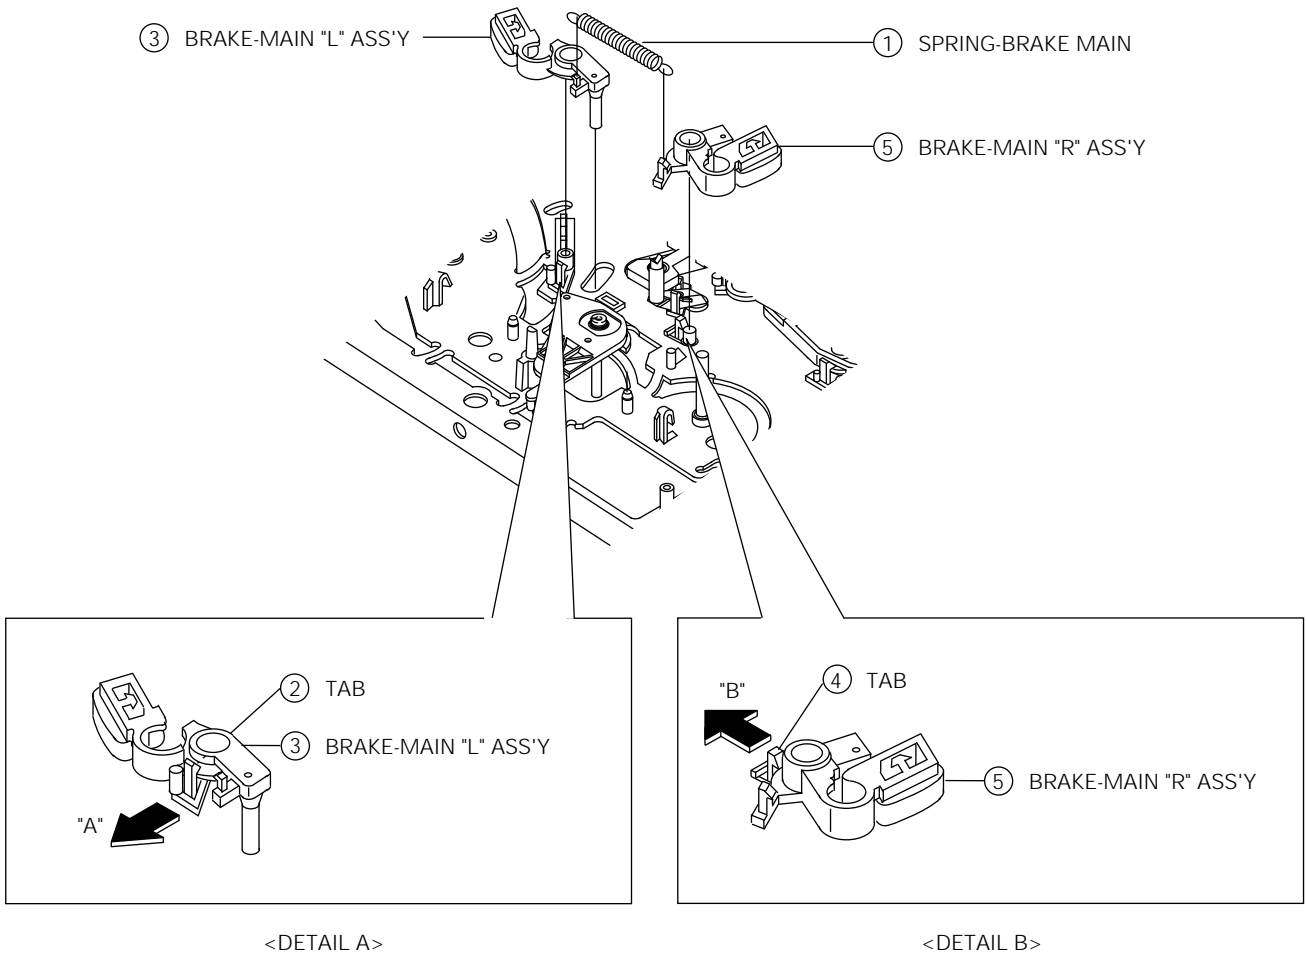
Brake Main "L", "R" Ass'y Removal
